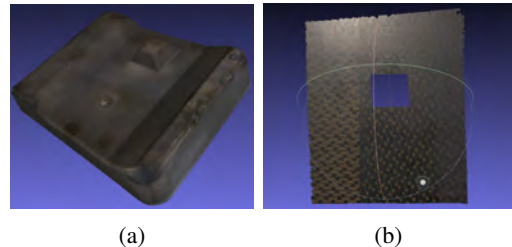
(a) Metal sheet mechanical part, (b) Example of a point cloud with removed defect points.
